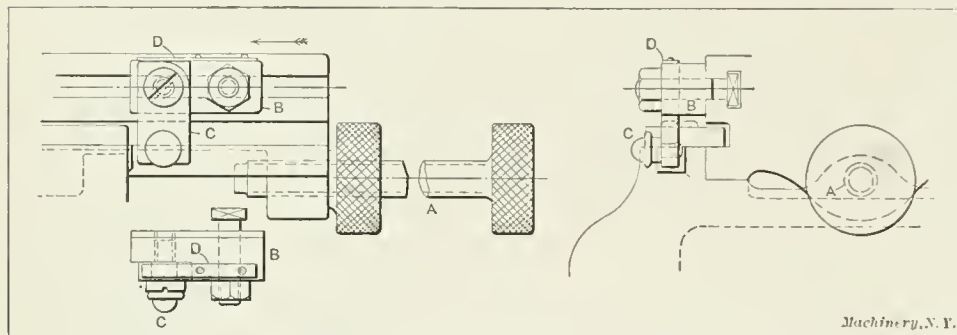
Double Stops used on Turret Lathe, making it possible to obtain Two Lengths without the Necessity of readjusting the Stop-screw
